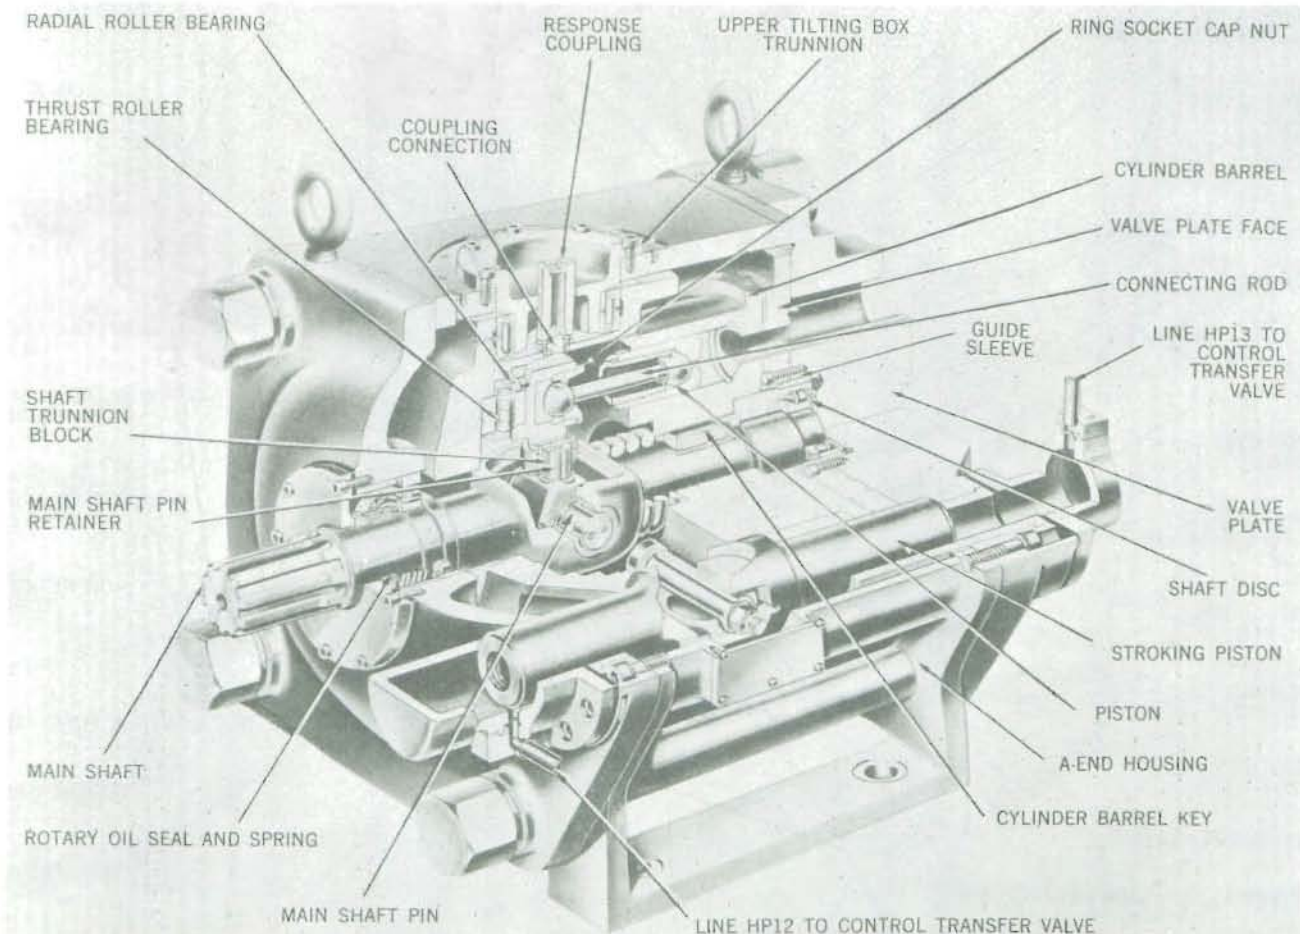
Training Gear A-end Assembly, Cutaway View
